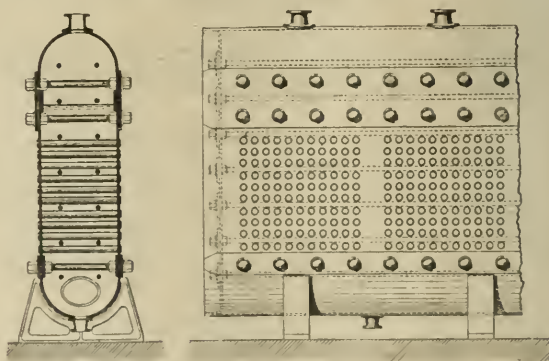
BONECOURT BOILER, RECTANGULAR TYPE.
